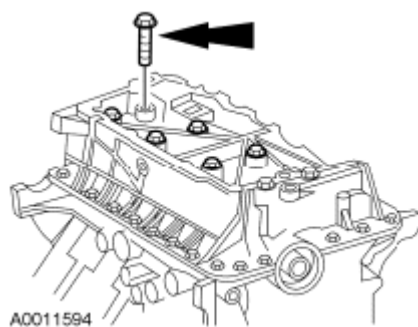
Installing Remaining Lower Block Cradle Bolts
